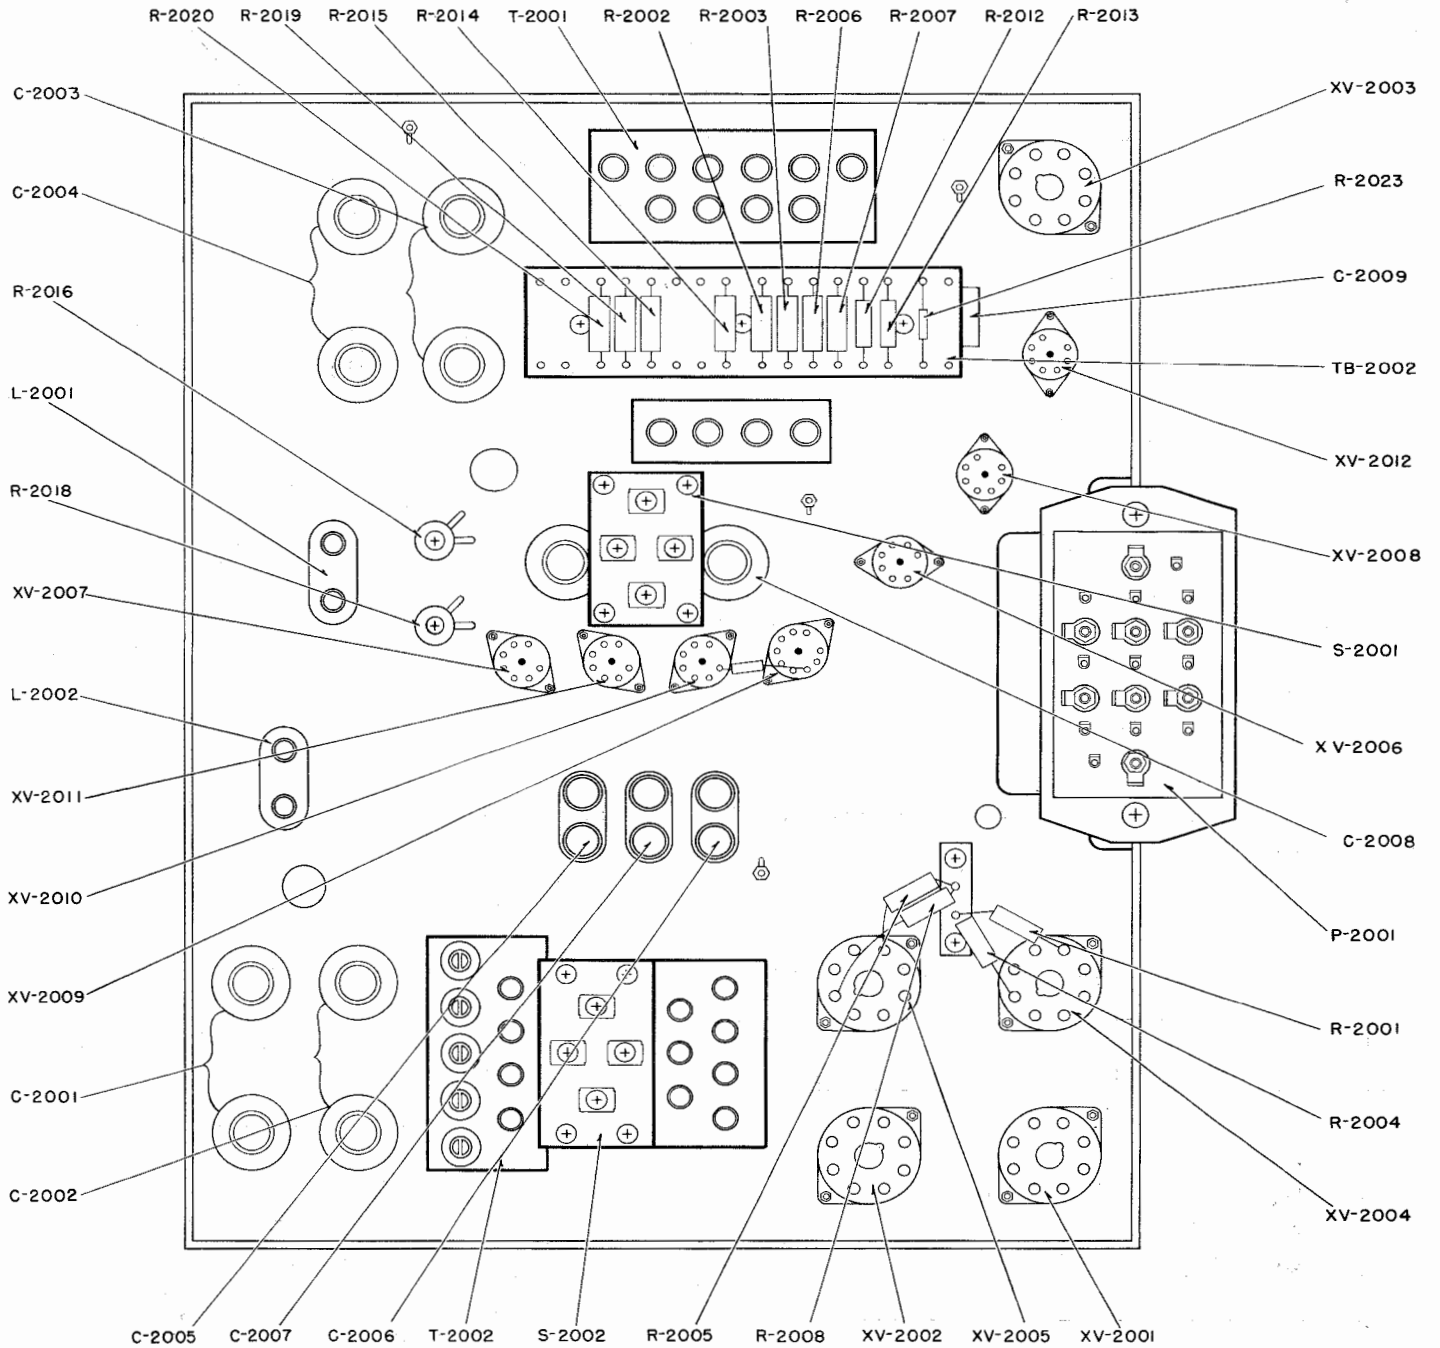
Component Locations Bottom of Chassis, Power Supply PP-590/FRR-24
